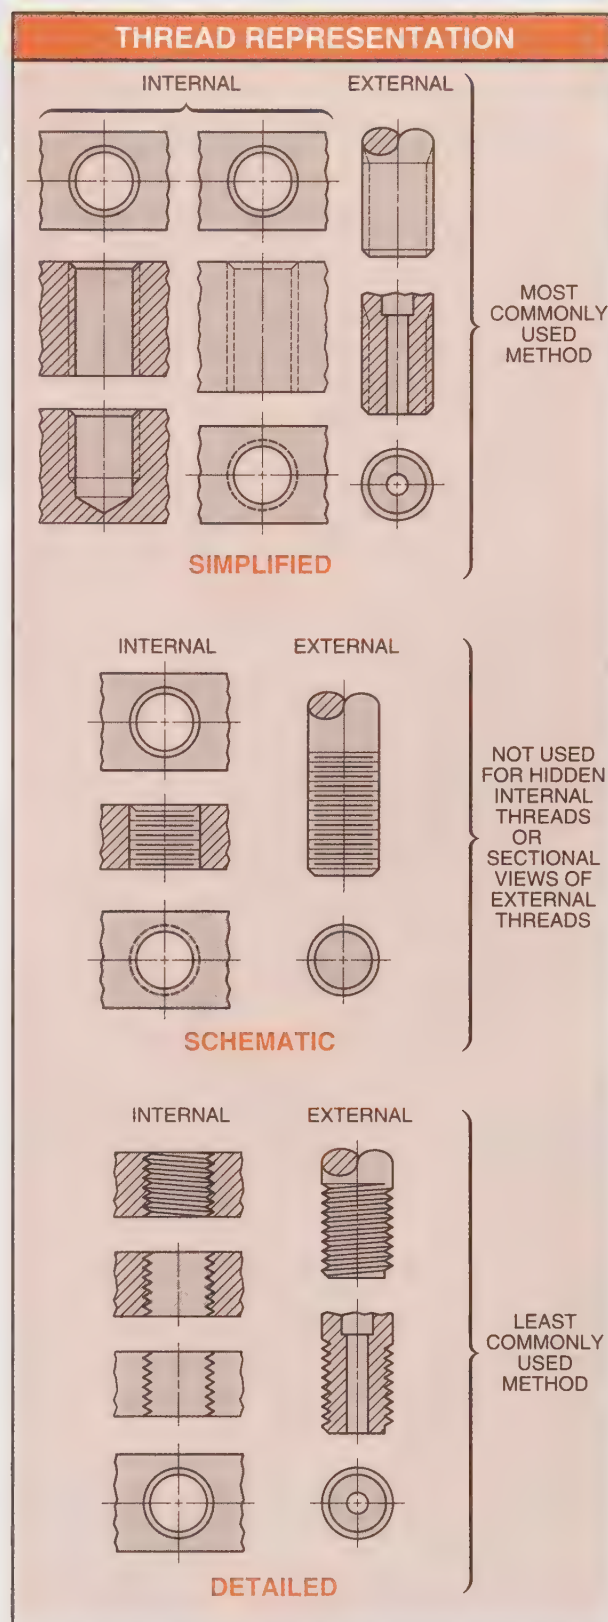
Thread representation is the method of drawing used to show a threaded part.
